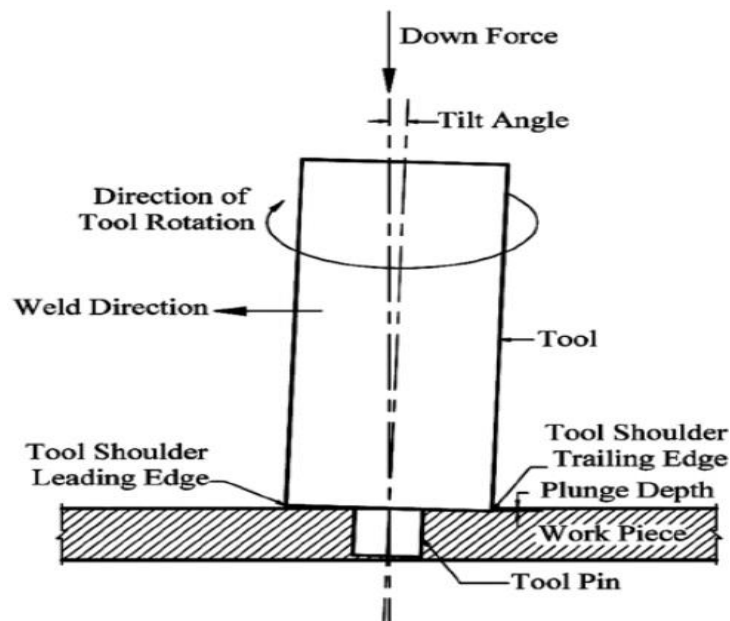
Schematic diagram of a typical FSW process and tool (reprinted) [5]
